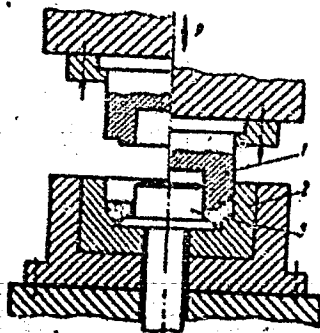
Press with lower ejector-base: 1. stamp; 2. die; 3. base
